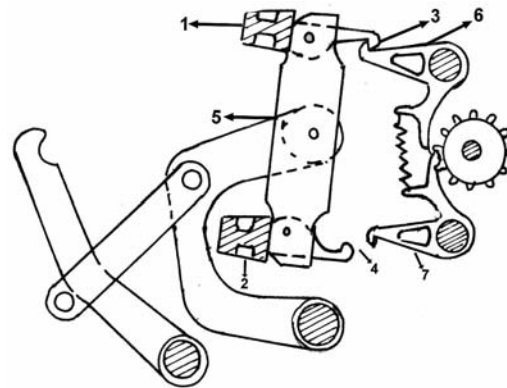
Control mechanism of Staubli 2521 (ref. 29) [1,2 – pushing bars; 3,4–hook; 5–baulk; and 6,7– control hook]
